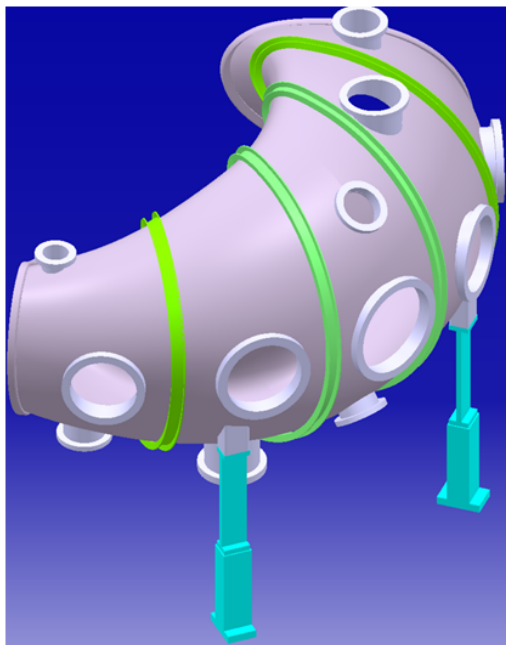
Type A section of main vessel, that is manufactured with 6 plates bent with mold, 2 large flanges to prevent welding deformation and 9 ports
